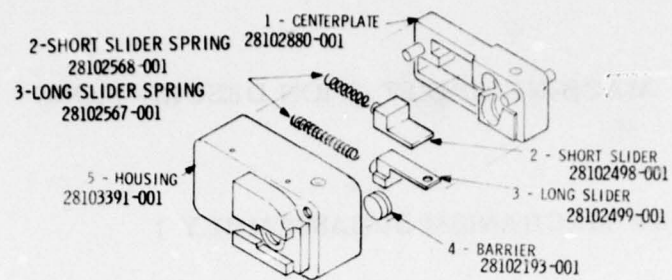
Machine 1 - S&A Mechanism Subassembly 1
